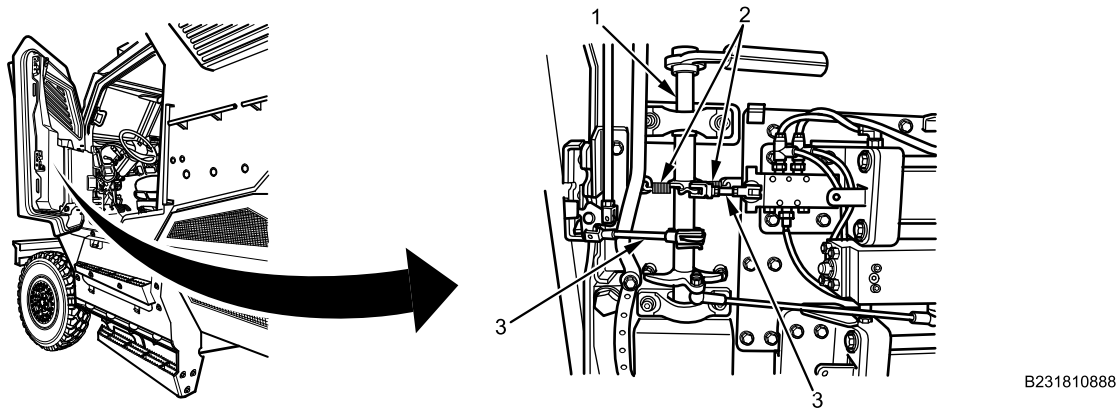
Inner Door Latch Handle Shaft in Neutral Position.
